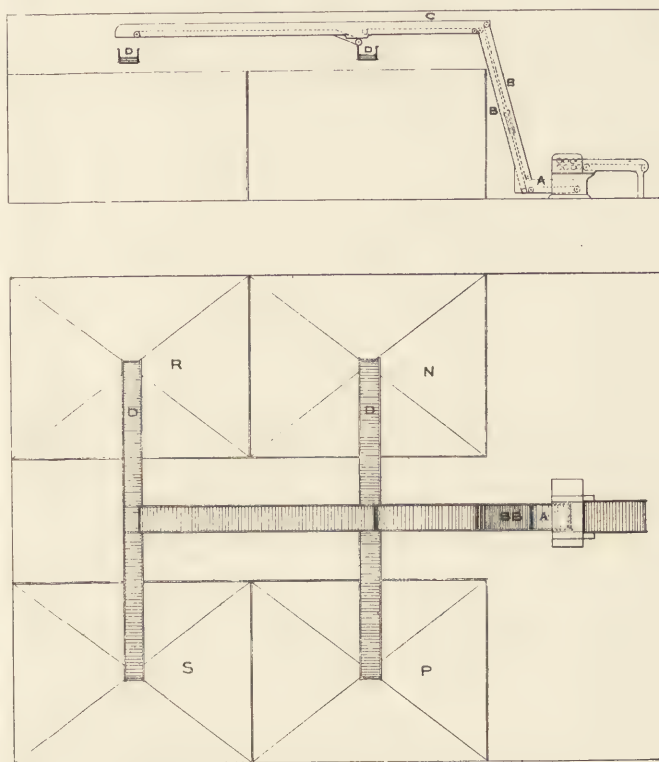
SECTION AND PLAN OF 'SPREADER' BALE BREAKER.
